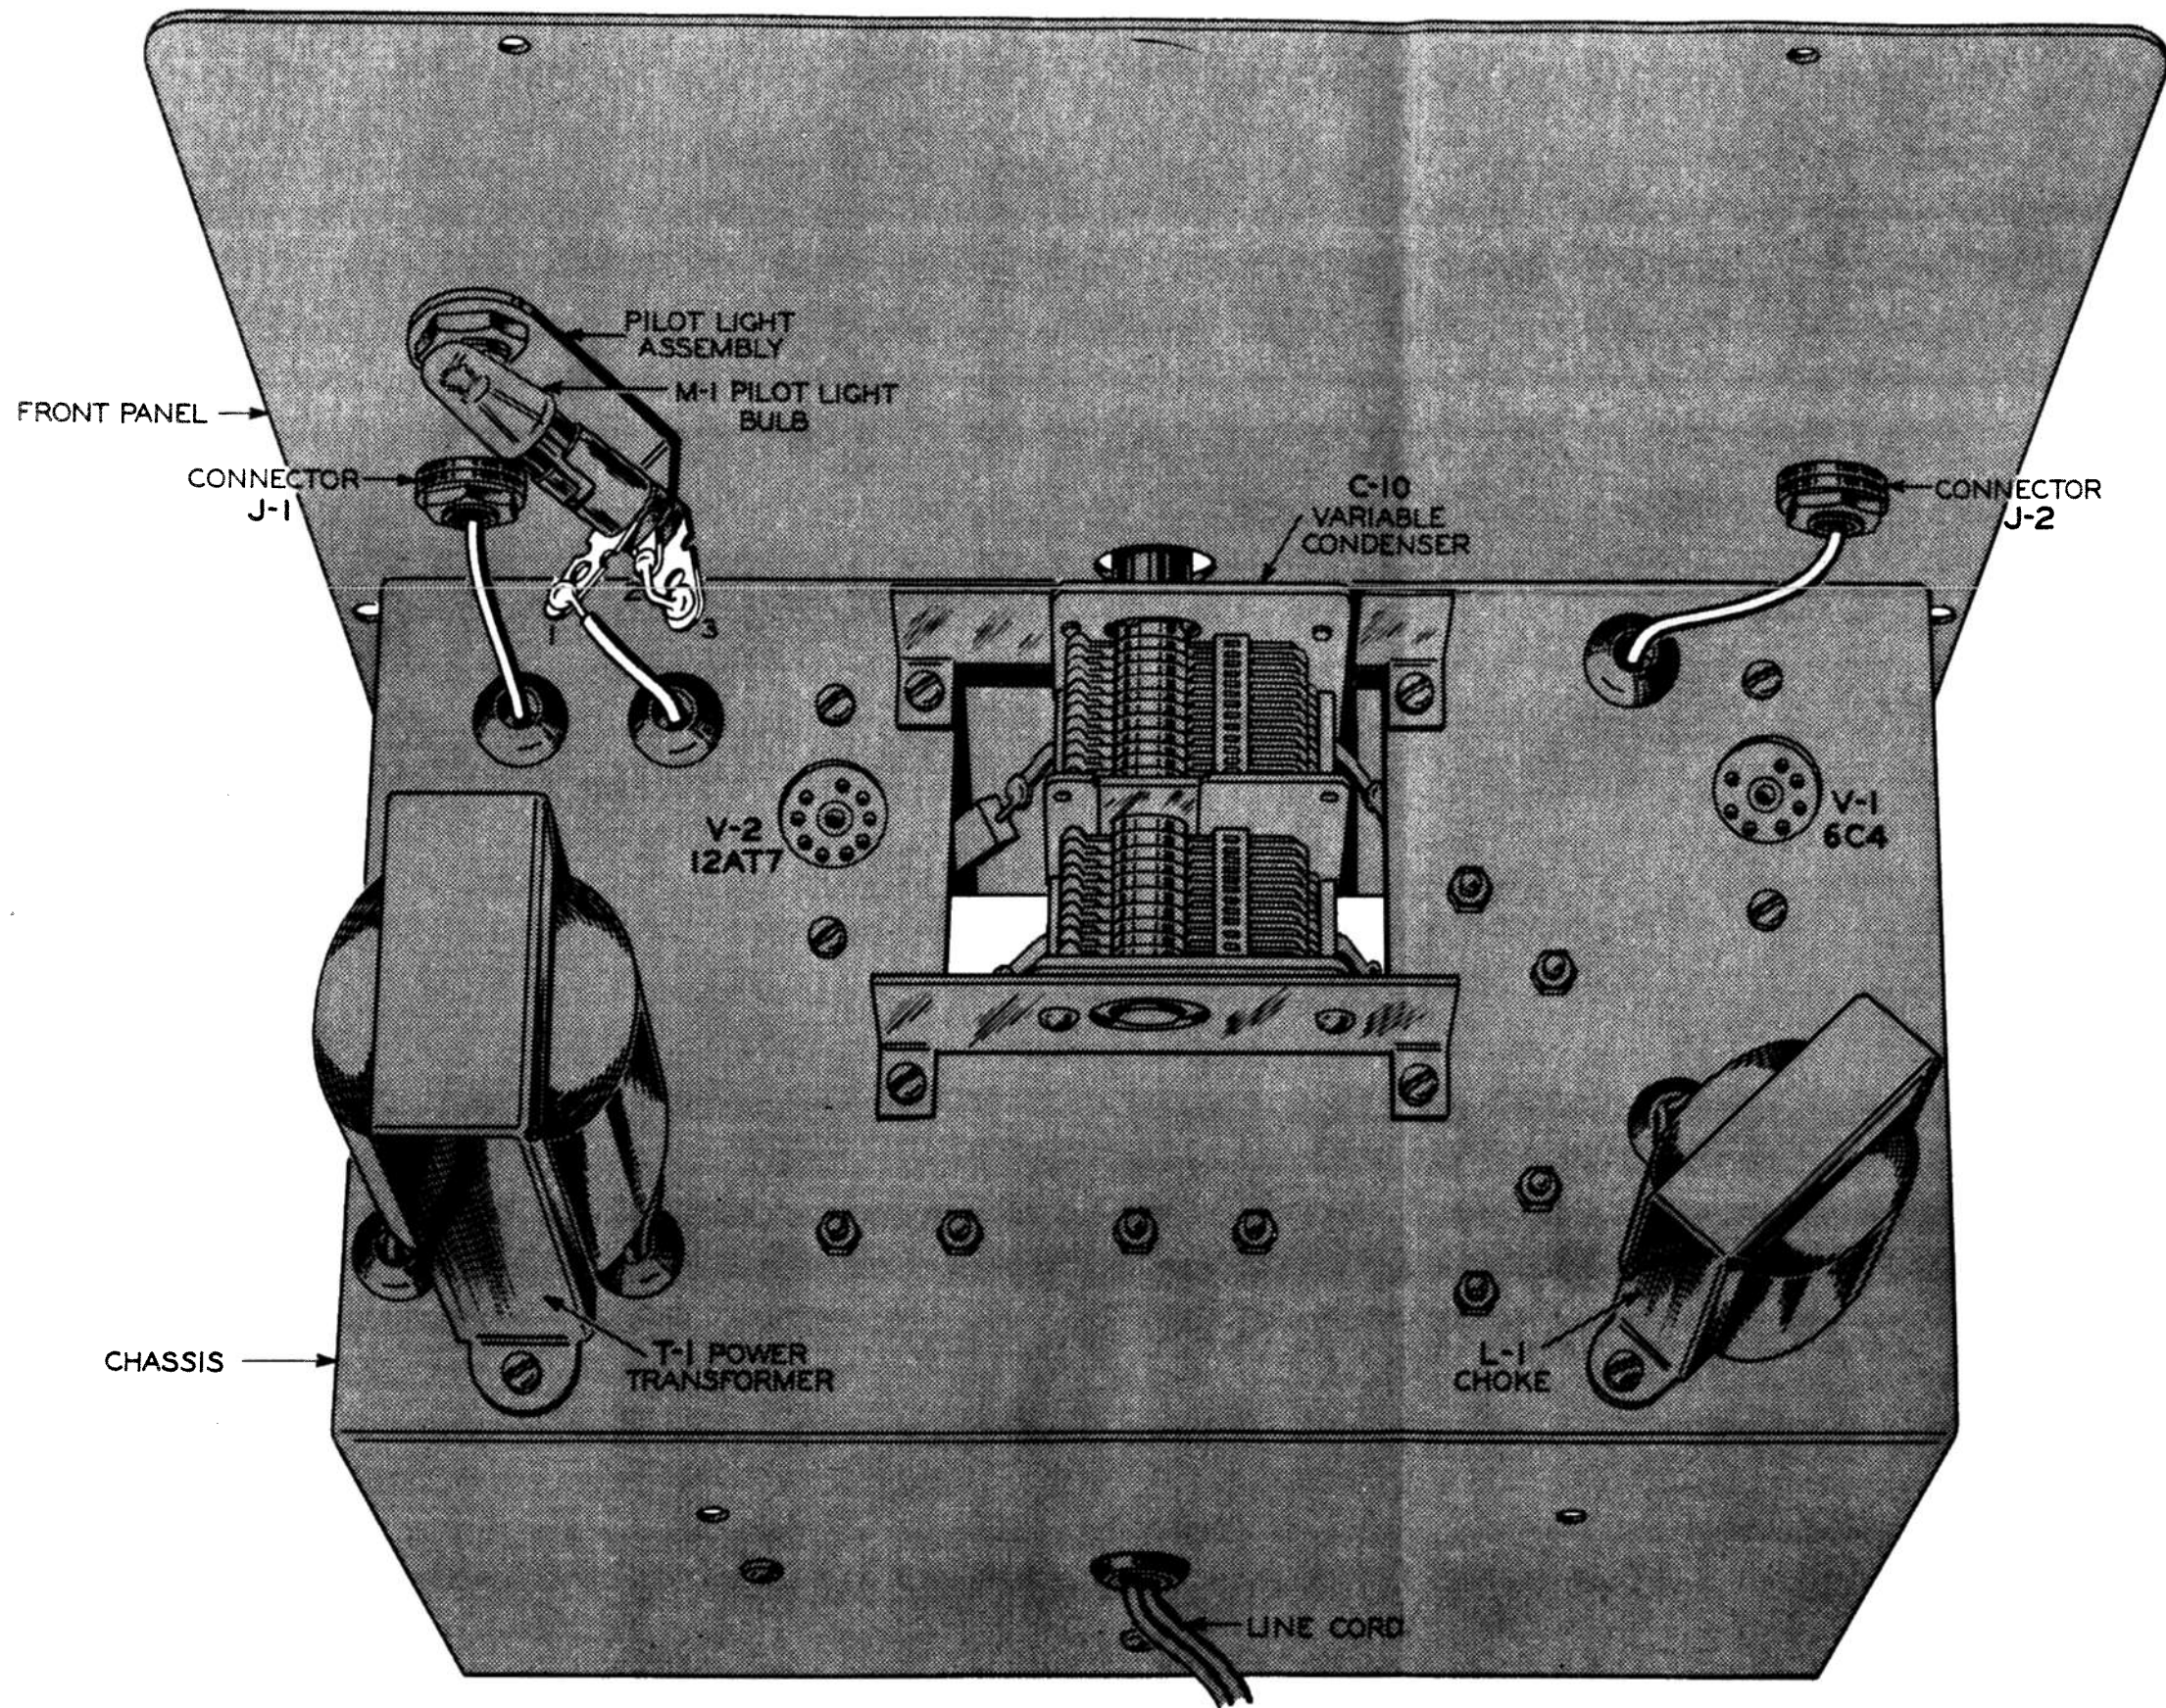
WIRING VIEW OF CHASSIS TOP SIDE.
